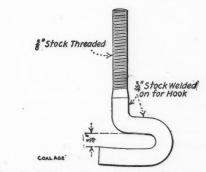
A HOOK BOLT USED IN SECURING THE ENDS OF TROLLEY WIRES
